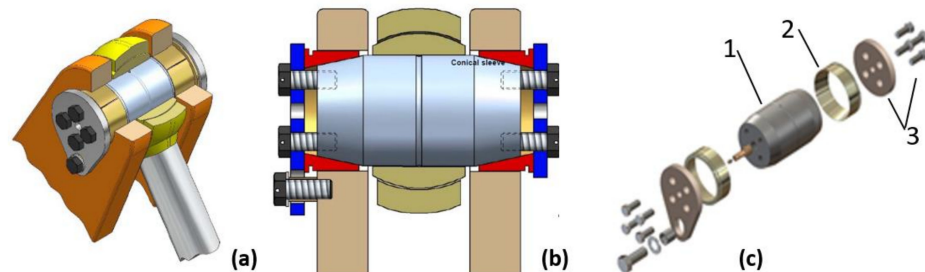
Expanding pin with single set of sleeves: (a) pin in joint, (b) cross-section view, and (c) exploded view.
